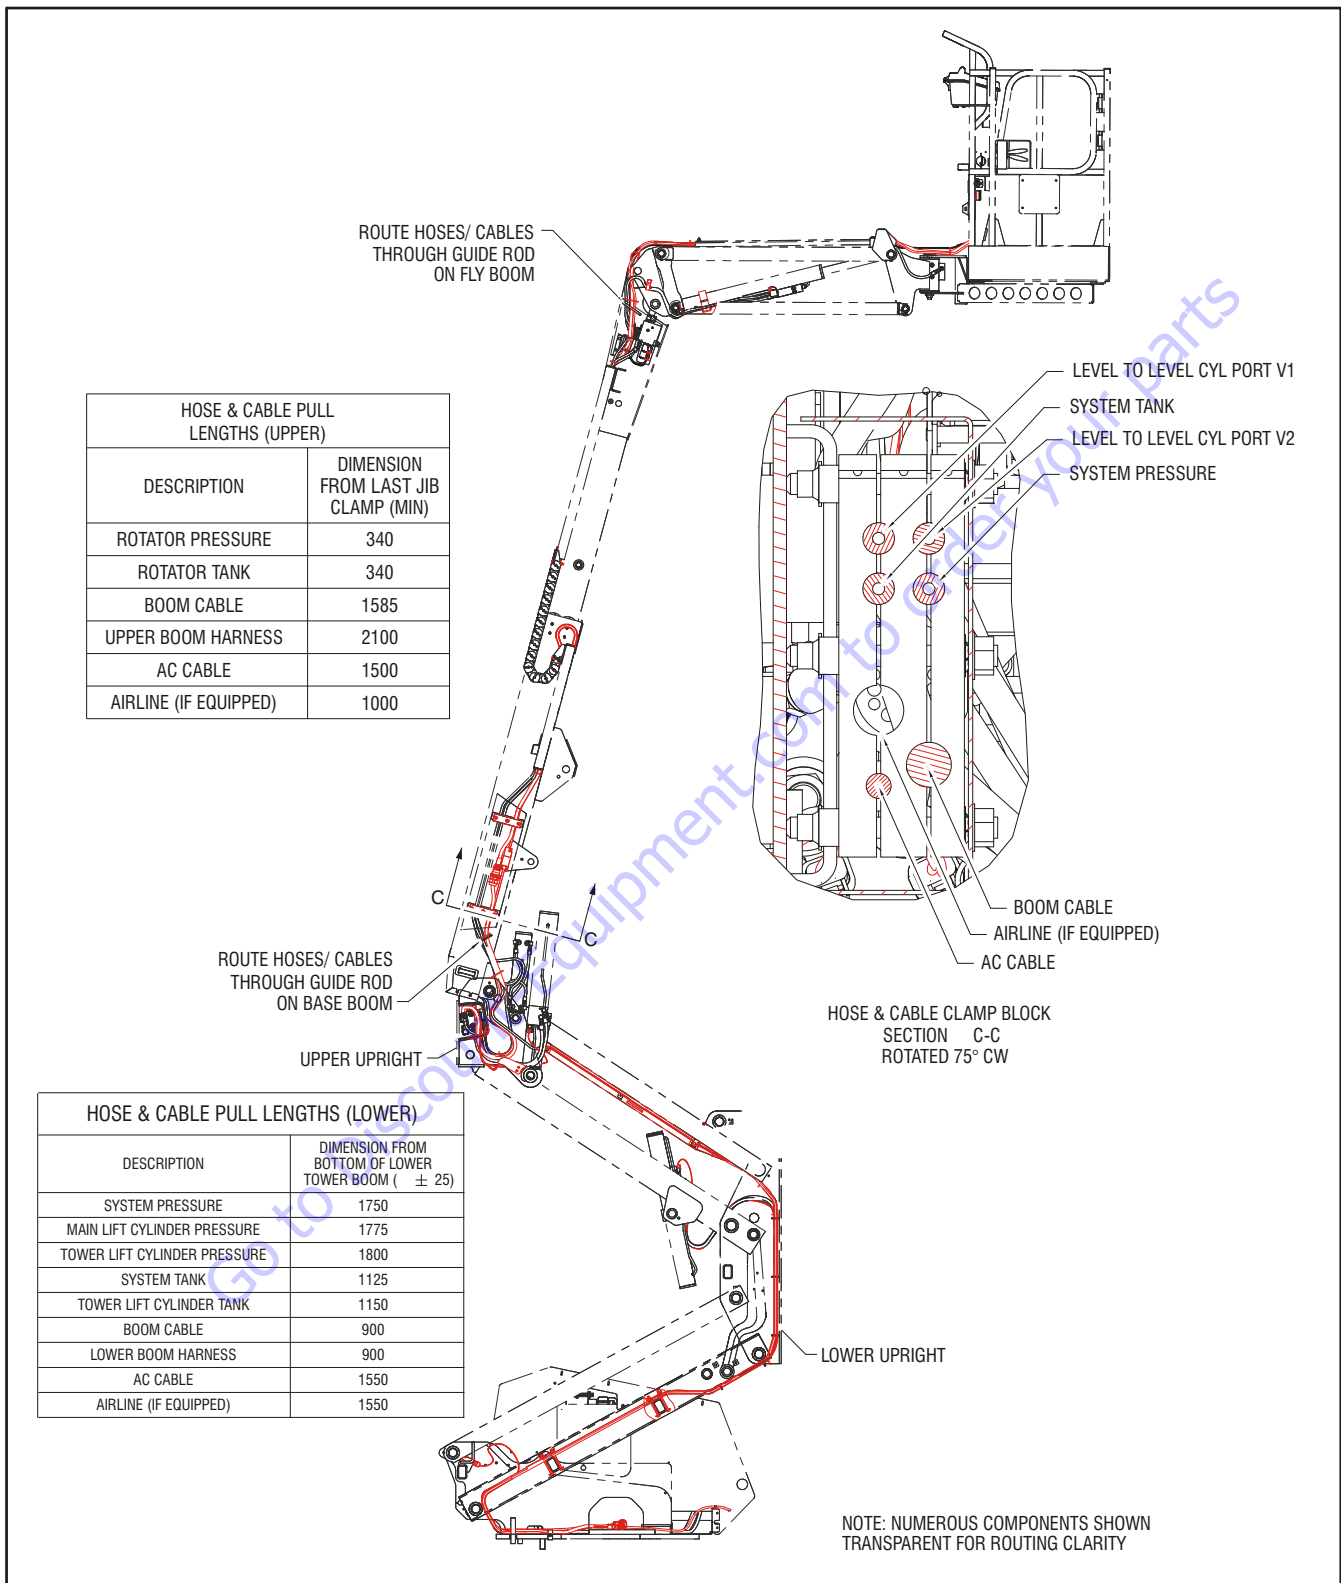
Cable Installation and Identification - Sheet 1 of 8
